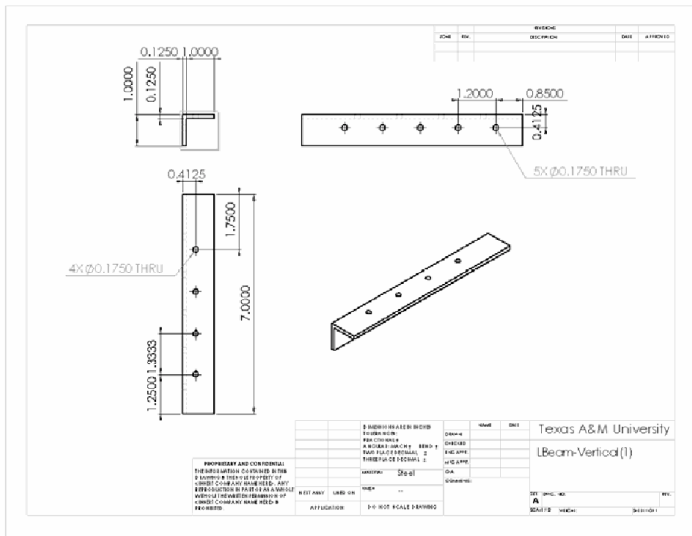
Drawing Sheets (generated using SolidWorks) for the Vertical L-Beams.
